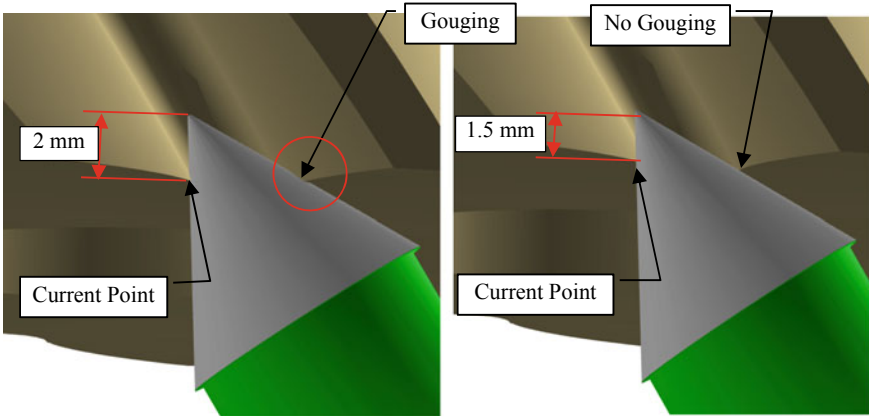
Chamfer Tool gouging on the opposite tooth flank
